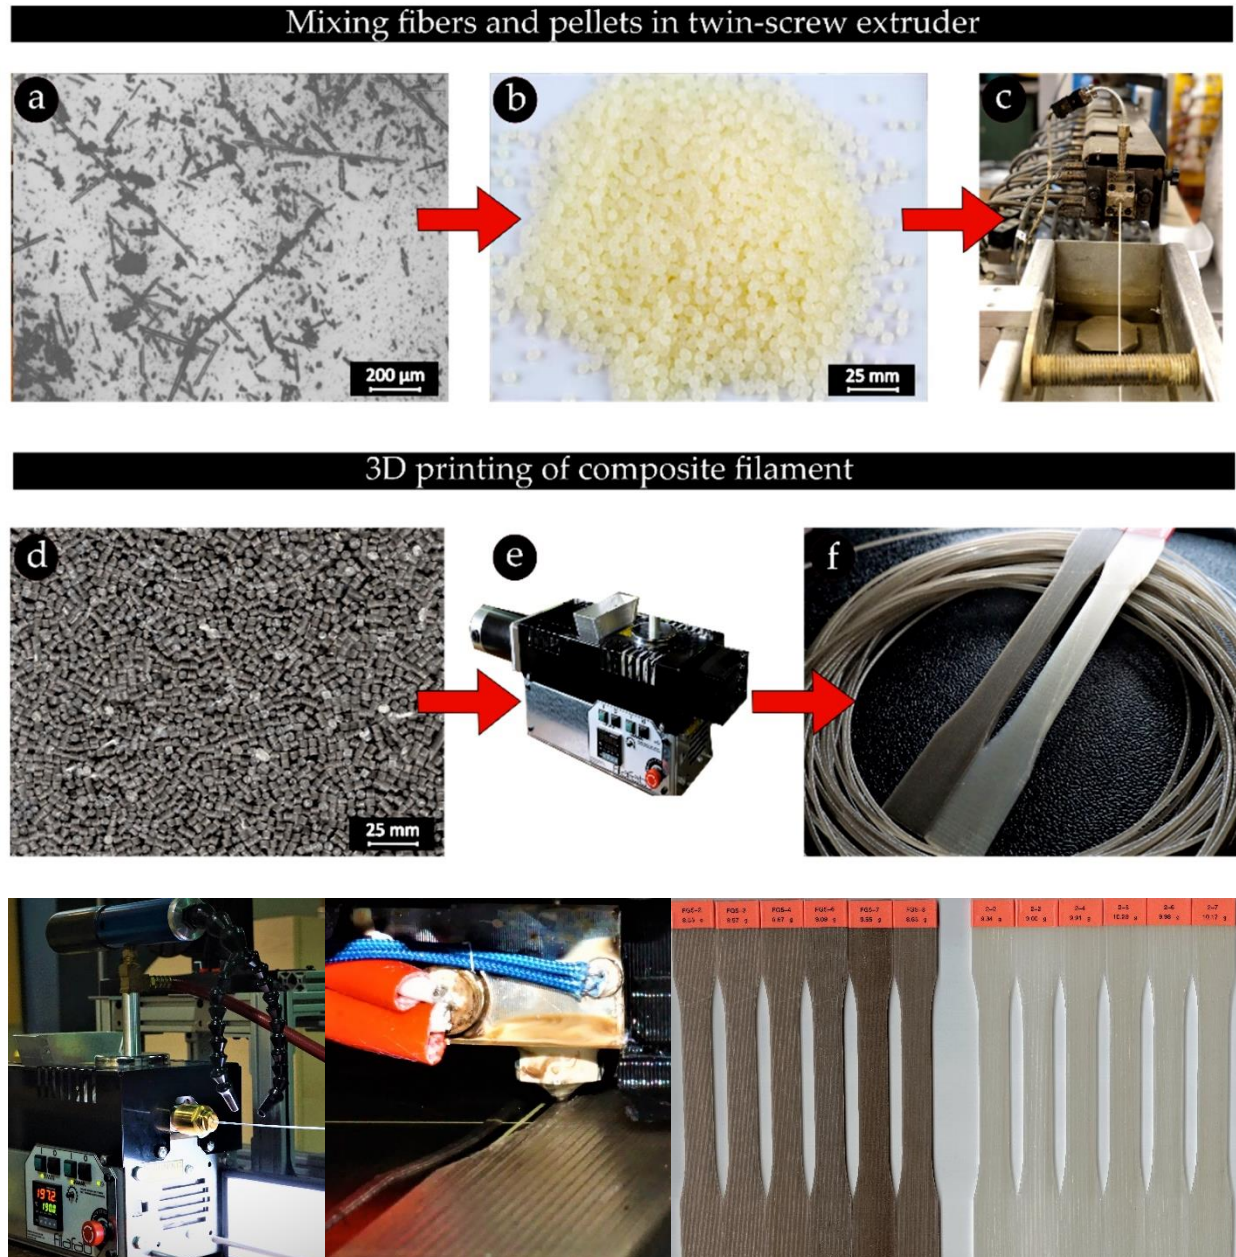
(a) fibers; (b) PLA pellets; (c) pelletizer; (d) RFG pellets; (e) extruder; and (f) coupons. [7]
